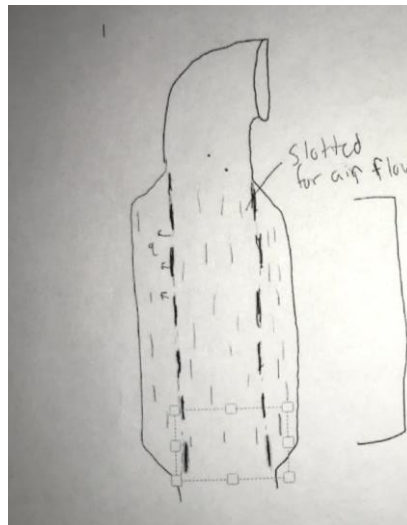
Hand Drawing of Device Positioned on the Exhaust Stack
